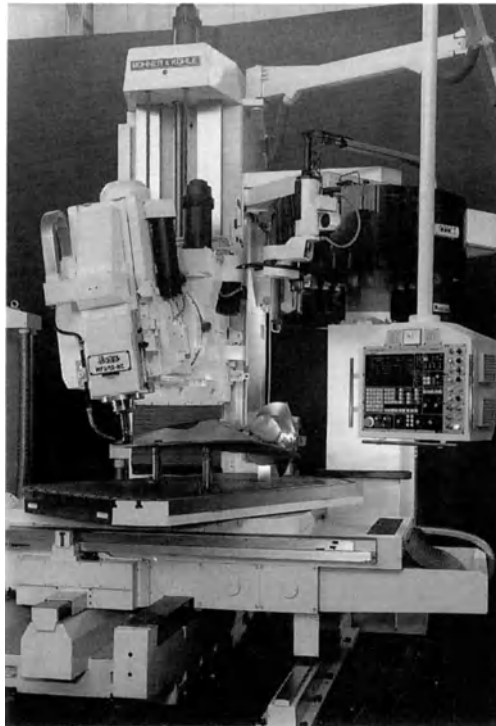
A 6-axis machining centre cutting a complex curved component. [Courtesy of Bohner & Kohle.]
